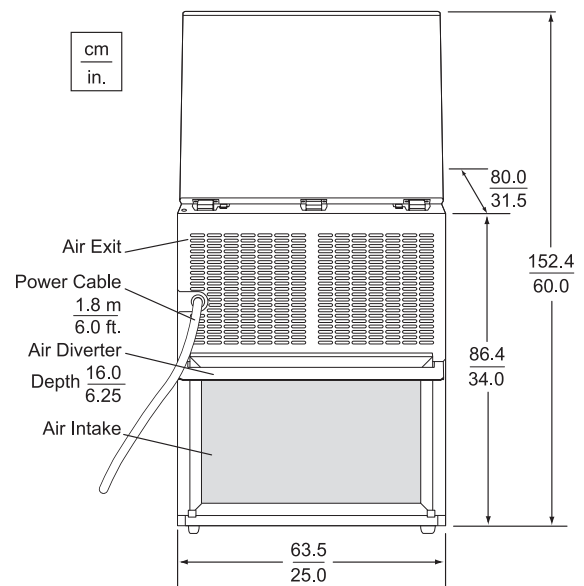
Rear View and Dimensions of the Avanti J-E Centrifuge
